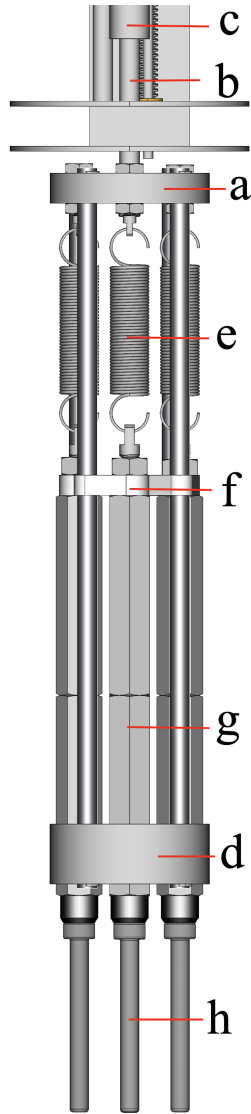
Carousel of the sample changer stick. a) upper aluminum round b) stainless steel round female threaded standoff c) shaft coupler d) lower aluminum round e) extension spring with hook ends f) PTFE linear guide g) female threaded hex bars h) vanadium sample can
